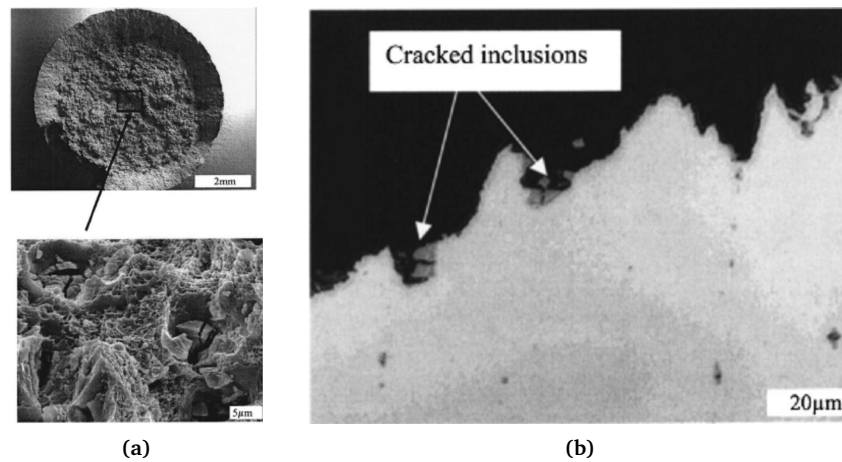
Dimple fracture in the notched tensile specimen [Bao and Wierzbicki, 2004a].
